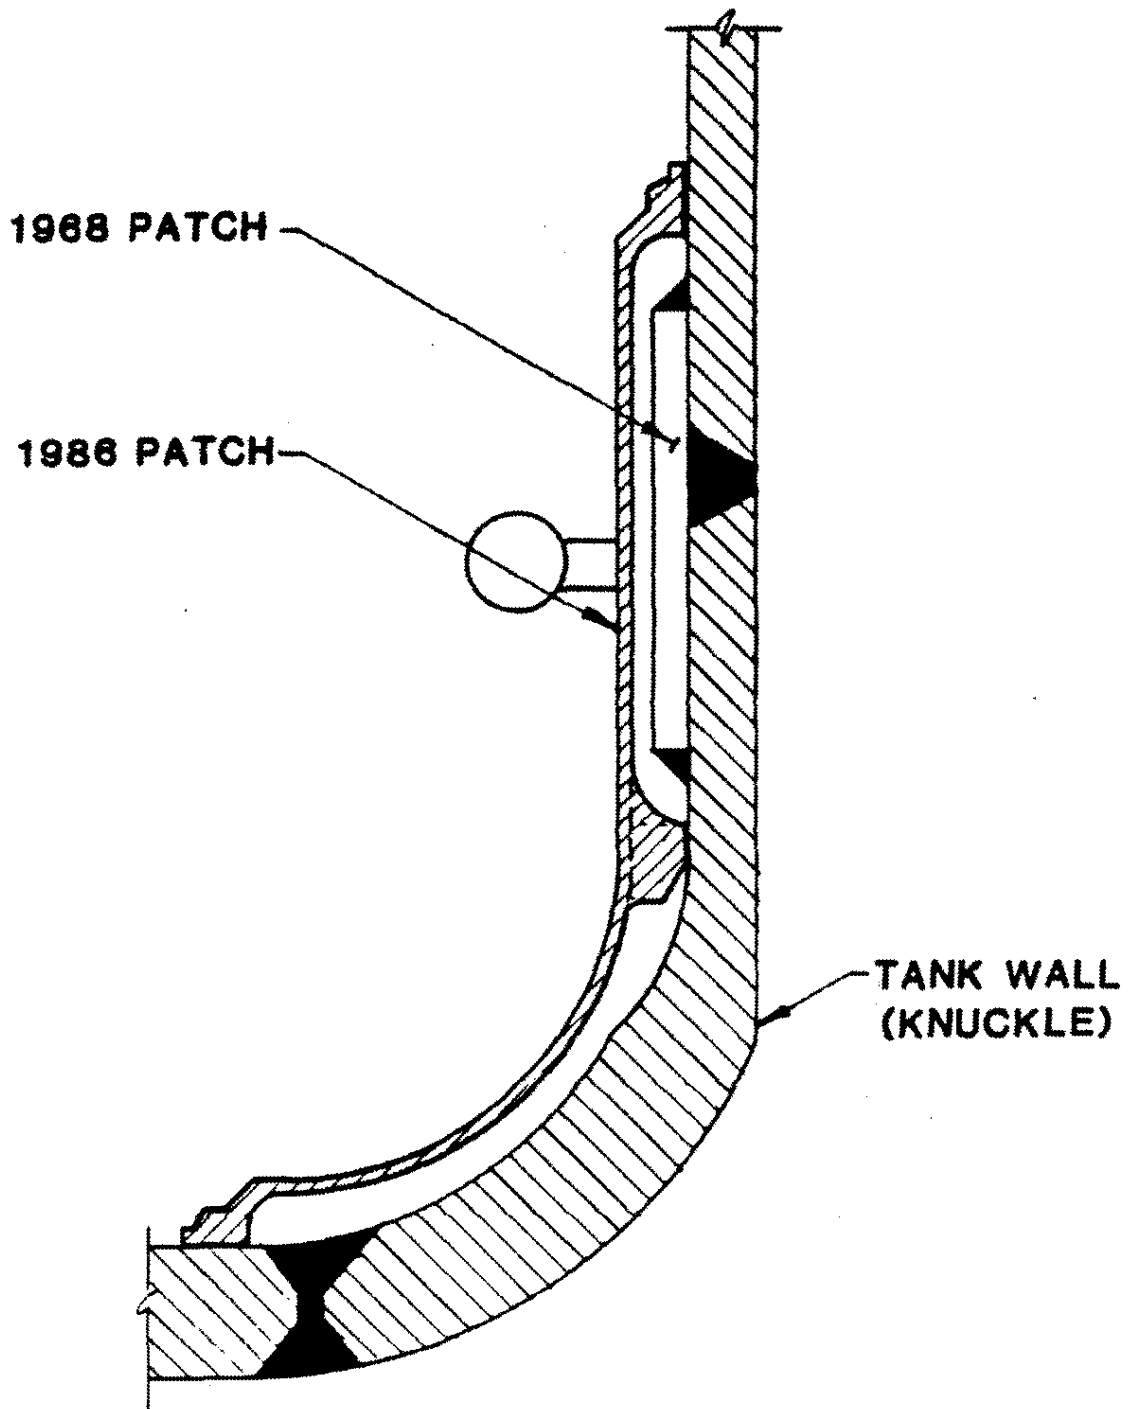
PATCH DESIGN COVERING KNUCKLE AND OLD PATCH.
